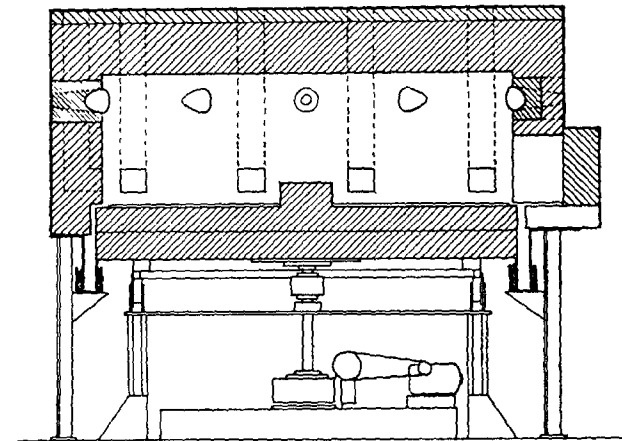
Example of a Rotary Hearth Forging or Heat-Treating Furnace.
